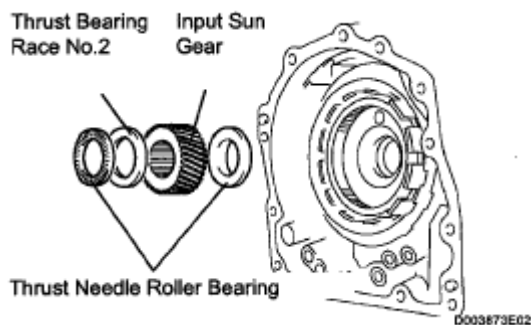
Identifying Thrust Needle Roller Bearings, Thrust Bearing Race And Input Sun Gear
